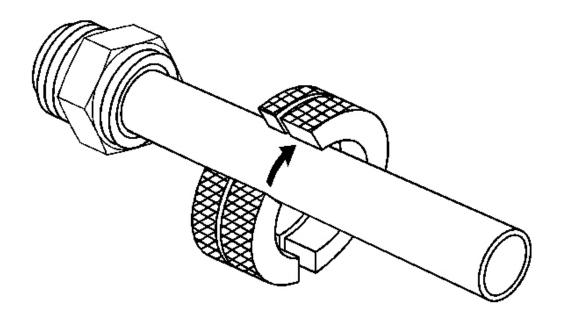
Installing J 41623-B Onto Transmission Oil Cooler Pipe Courtesy of GENERAL MOTORS CORP.
